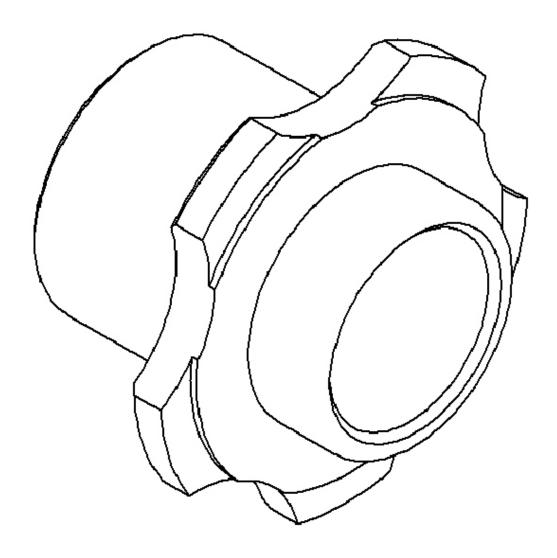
Front Crank Seal Installer 9072 Courtesy of CHRYSLER LLC
